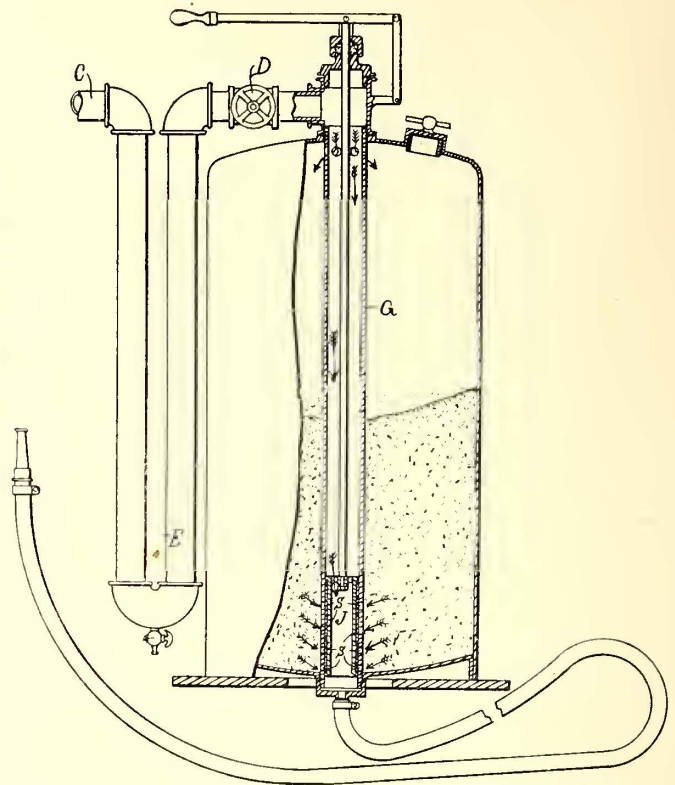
OUTLINE SECTION OF SAND-BLAST
